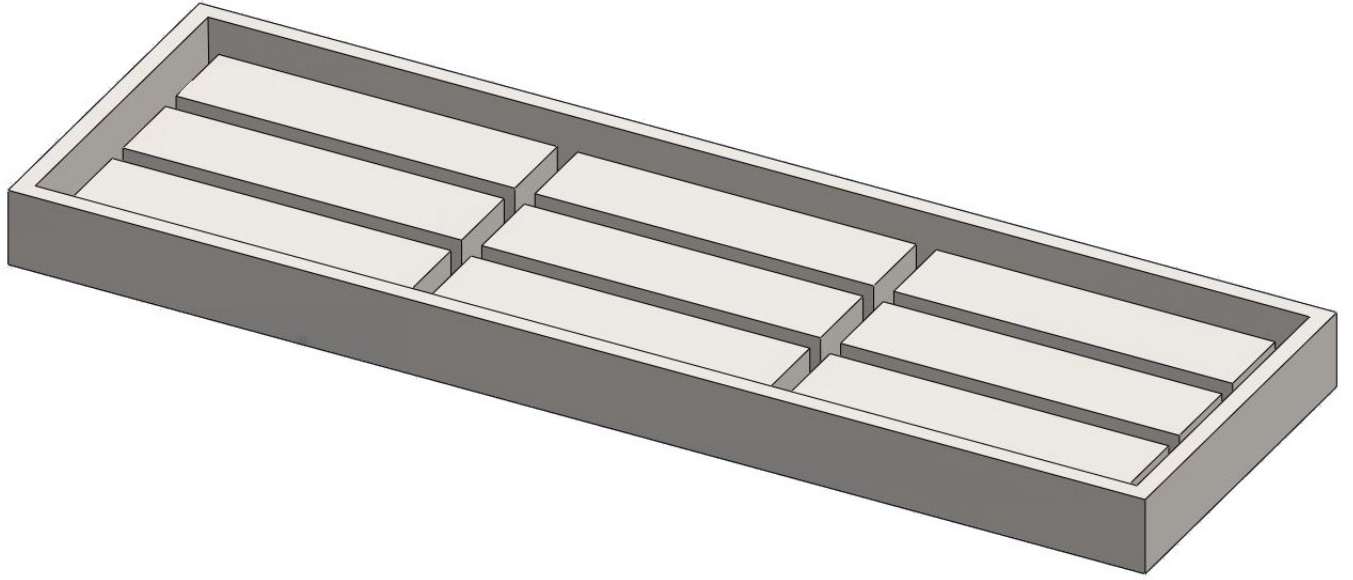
Second Smallest Specimen Mold Positive. Units: mm
